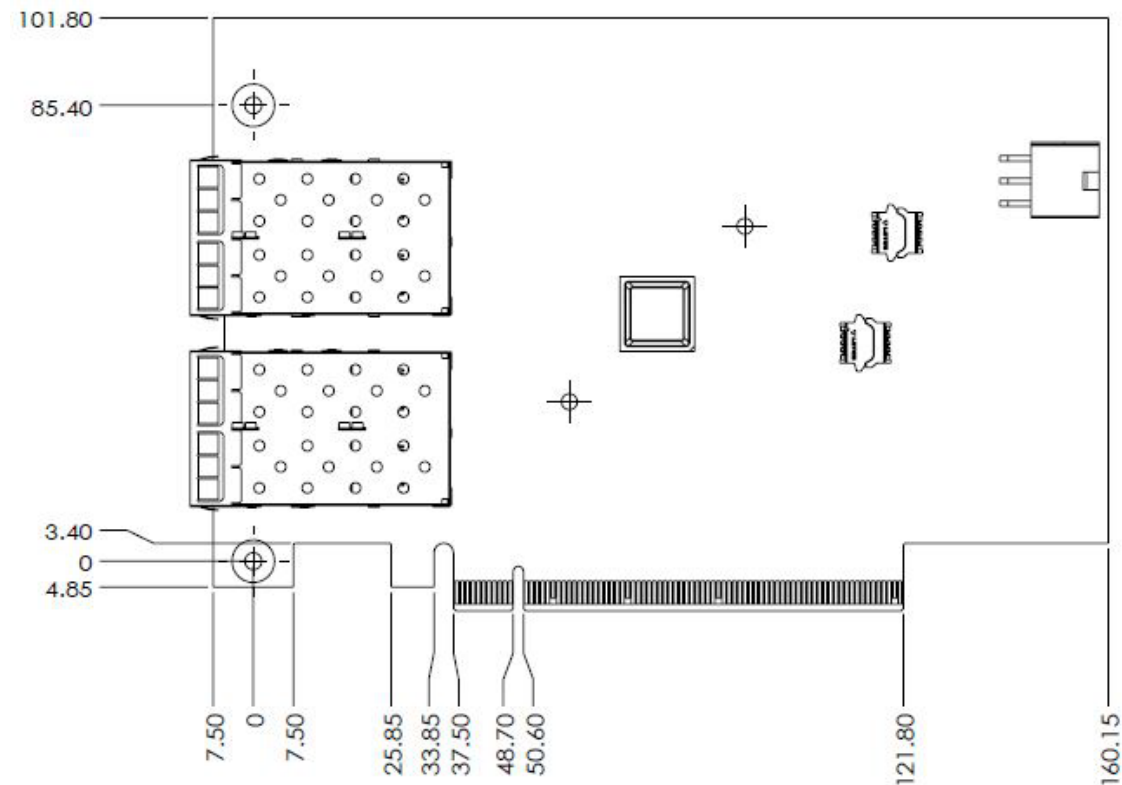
CEI-4x10G-SFP+ mechanical dimensions
